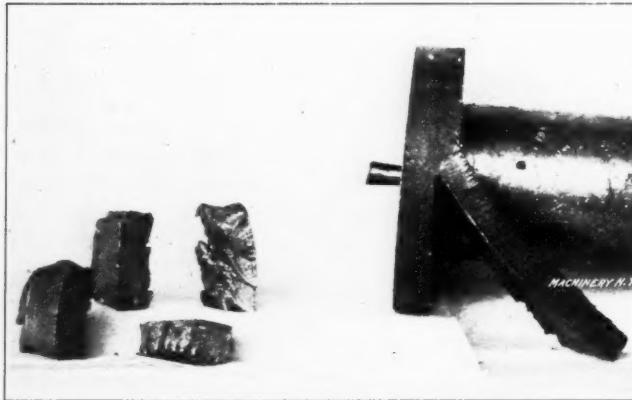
Sample of Broken Chips and Work with an Unbroken Chip. This View is nearly Full Size. The Exact Dimensions of Sample are 13.4 Inch Diameter turned down to about 1 Inch; feed about 7 per Inch; Cutting Angle of Tool about 38 Degrees; Extreme Edge 1-32 Inch Flat. These Chips were broken by a Chip Breaker.
